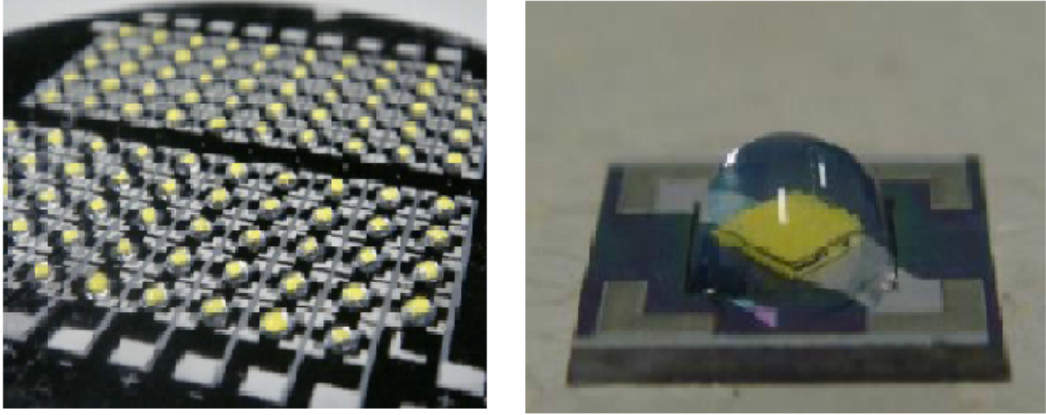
Left: photograph of wafer level encapsulated LED array. Right: photograph of a single LED component. [29]
